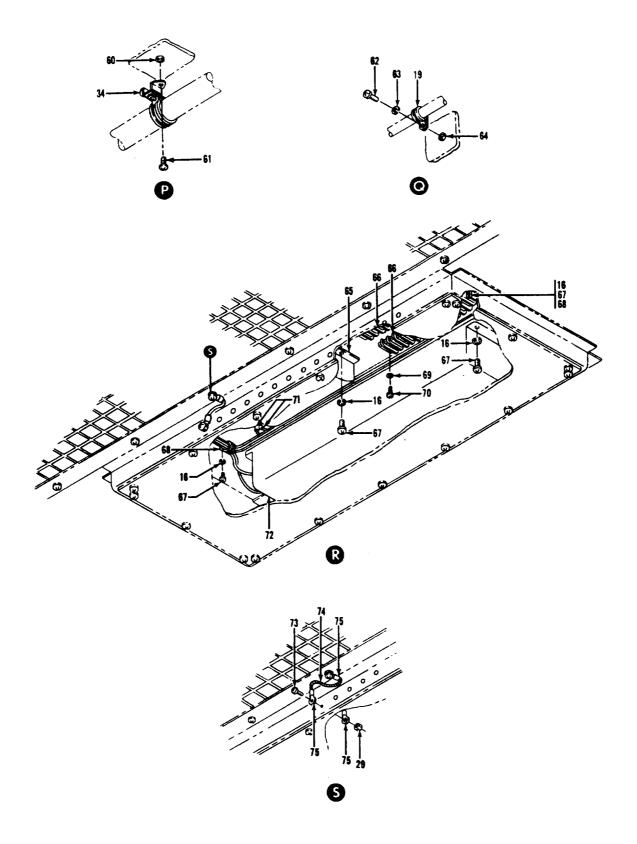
Electrical Equipment Installation (Sheet 7 of 19)
